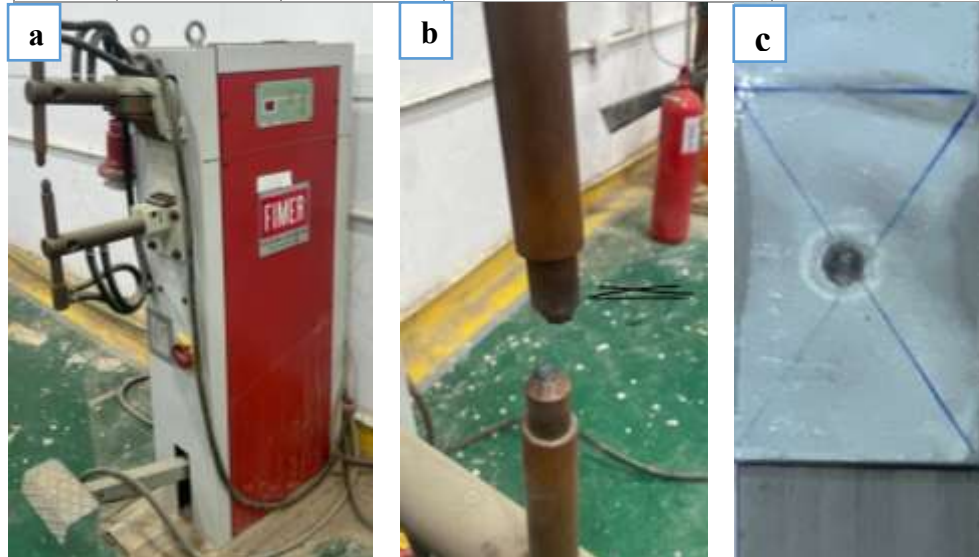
Experimental setup used for the resistance spot welding process: (a) FIMER FC45 resistance spot welding machine, (b) copper electrodes, and (c) dissimilar lap-joint specimen after welding.
